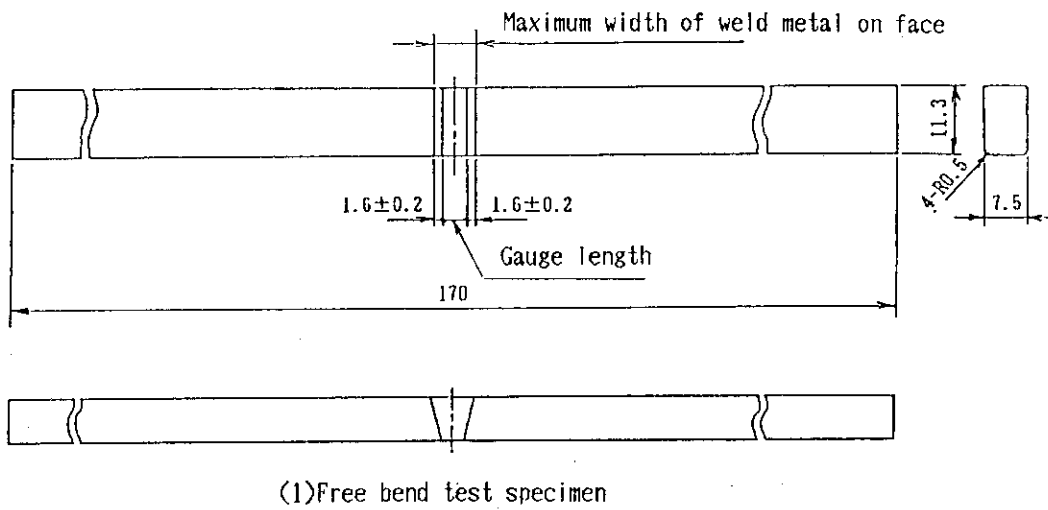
Geometry of free bend and root bend test specimen for Hastelloy Alloy XR welded joint
